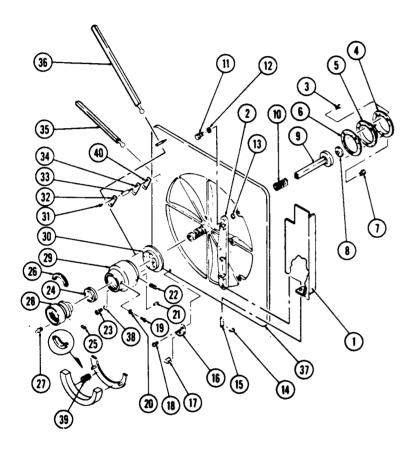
DOOR LOCK AND HINGE ASSEMBLY (Part 1 of 2)
